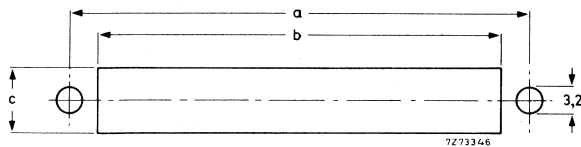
Panel mounting; see Table 2 for dimensions a and b.
